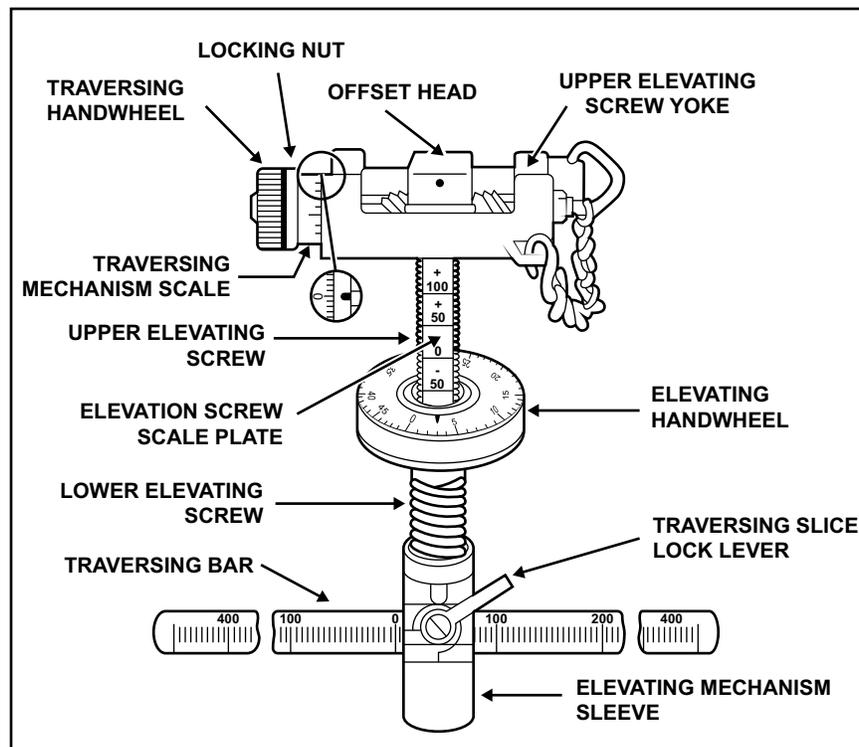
Traversing and Elevating Mechanism for the M240B.
